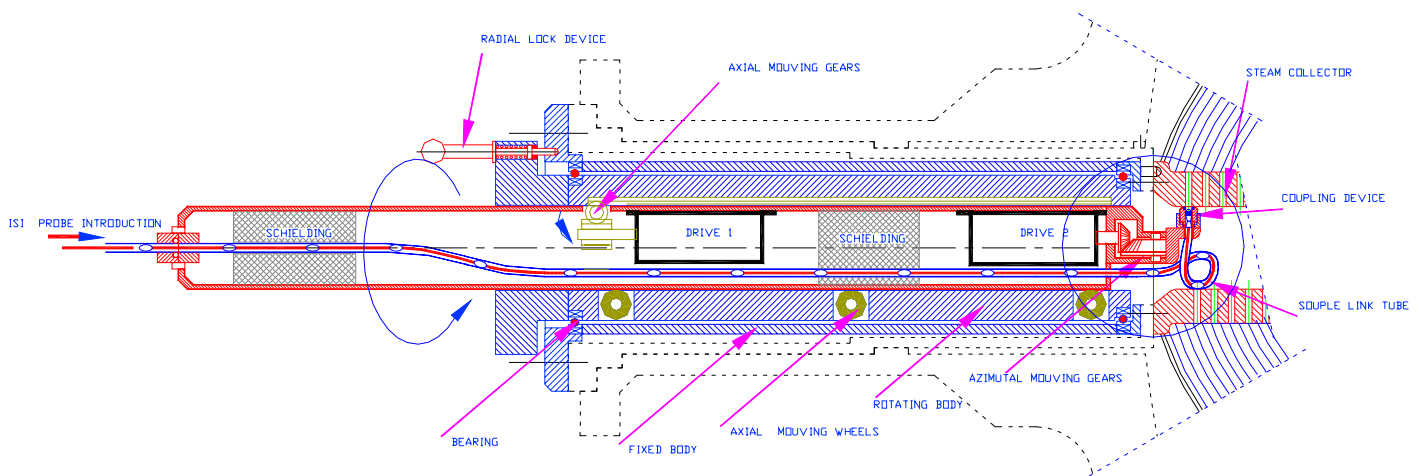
Scheme of the ISI probe assembly bolted on the steam nozzle
